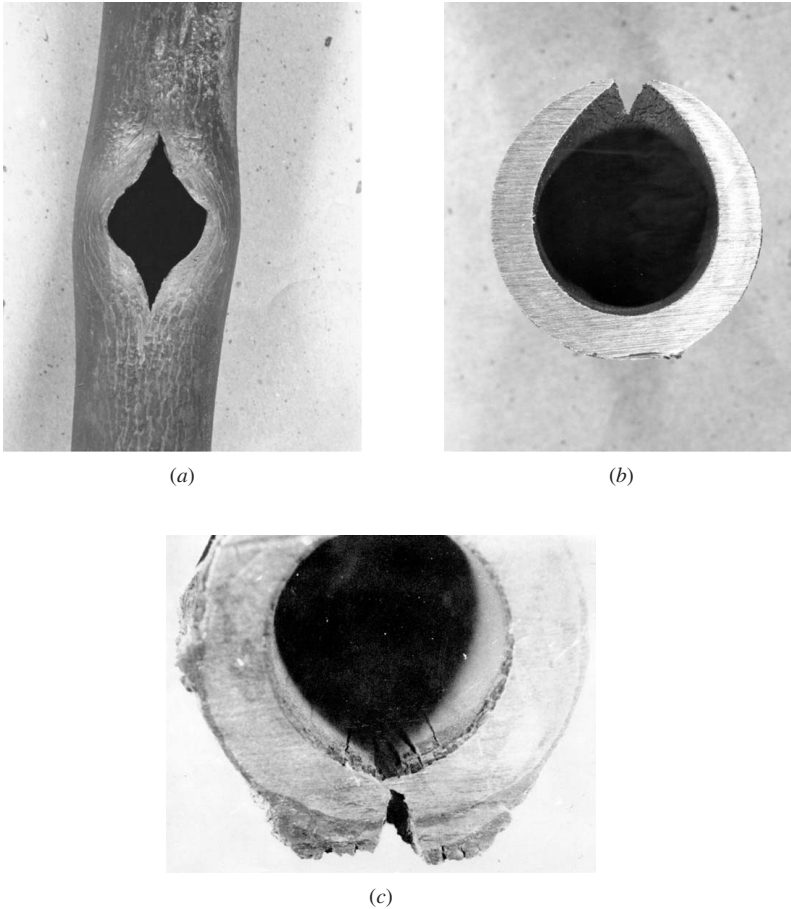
(a) Longitudinal view of a thin-walled creep fracture. (b) Cross-sectional view of a thin-walled creep fracture. (c) Cross-sectional view of a thick-walled creep fracture. (After French, 2. Reprinted with permission.)
